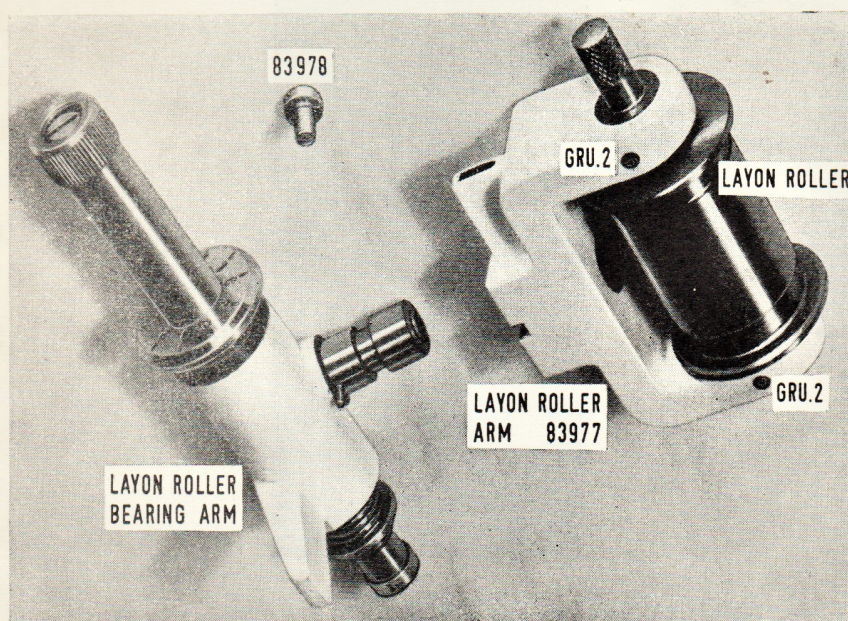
LAYON ROLLER AND ARM PART DISMANTLED
